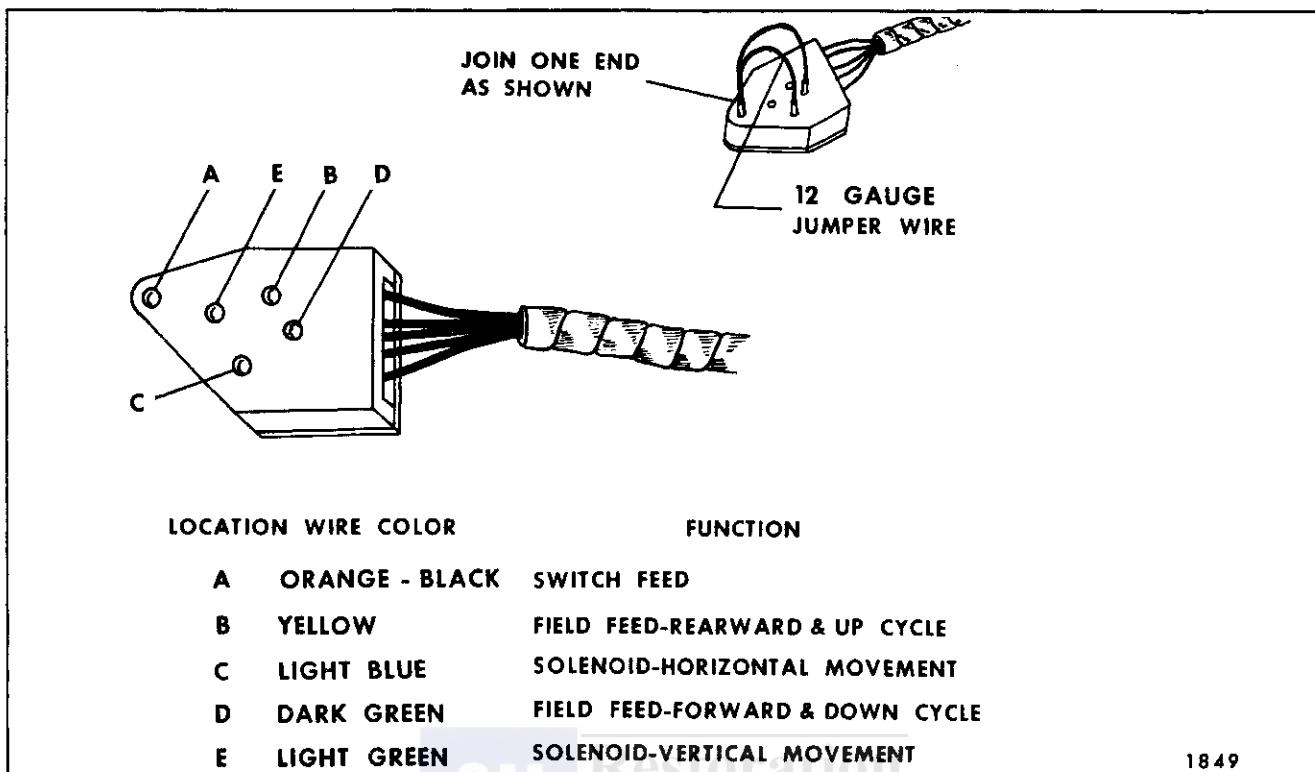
Four-Way Seat Switch Block - All Styles Except Oldsmobile "B & E"
